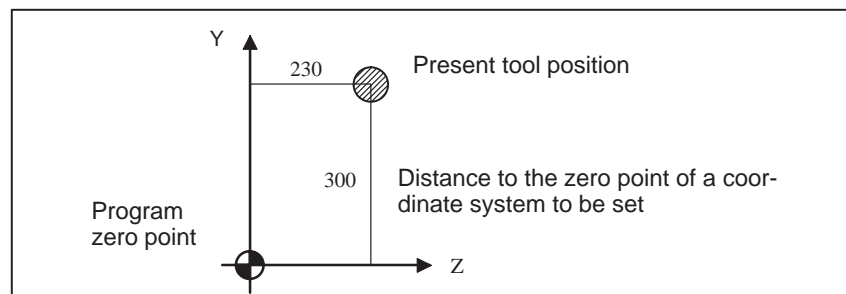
(b) Coordinate system specified by the CNC
